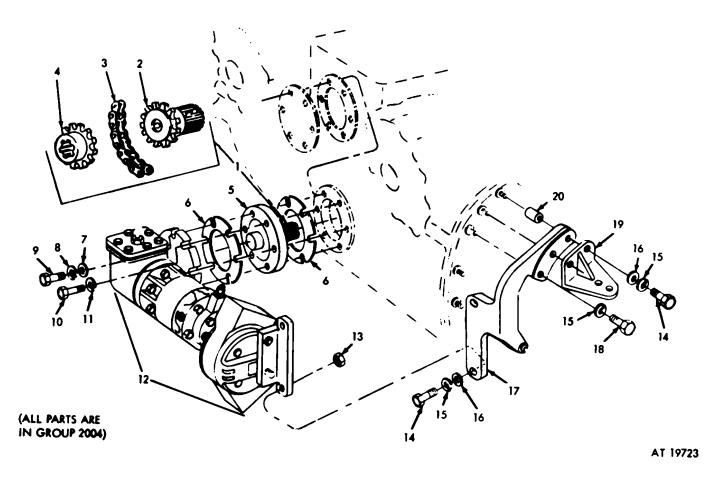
Power take-off assembly, mounting brackets, sprocket assembly and related parts-partial exploded view.
